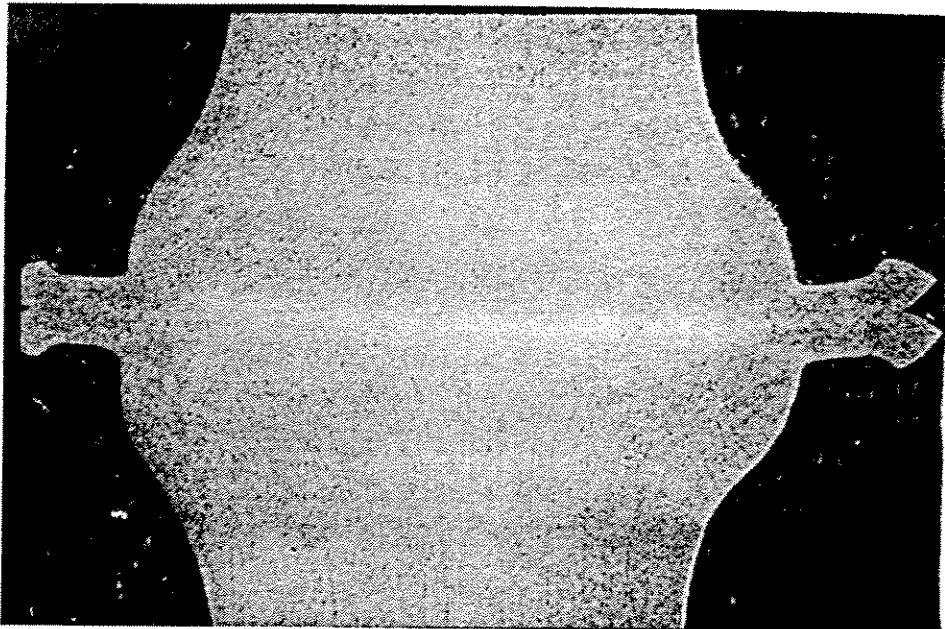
Macrograph of D5.4 Weld Profile, Mag. 6X
